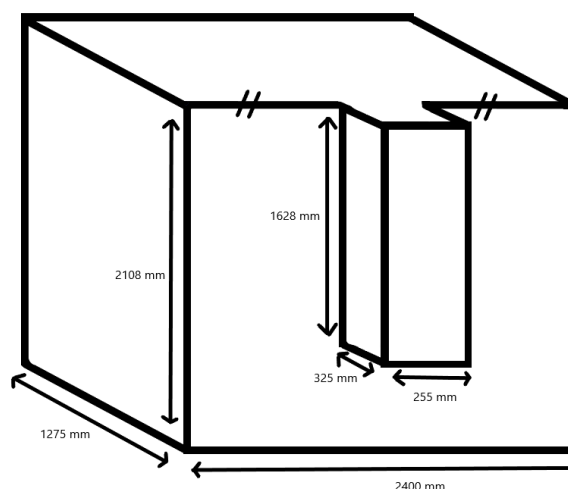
Sketch Of The Maximum Dimensions Of The Tubefeeder.
